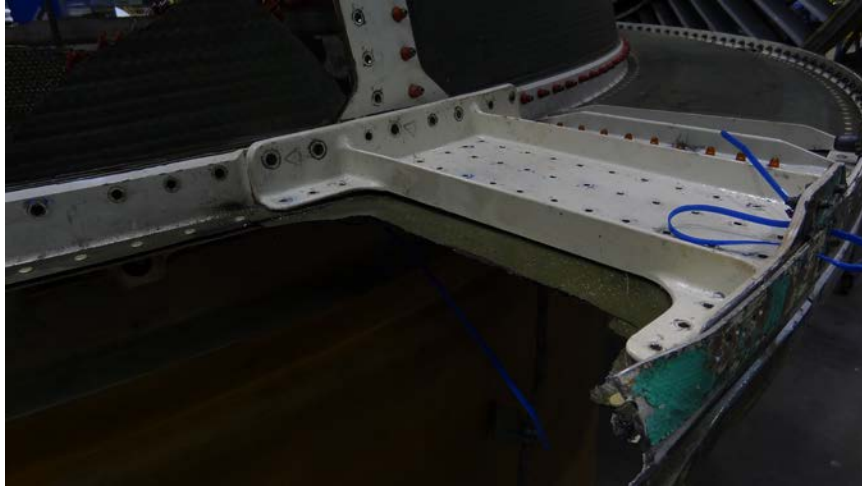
View of the outer stiffener remaining attached to the splice plate. (Boeing)
